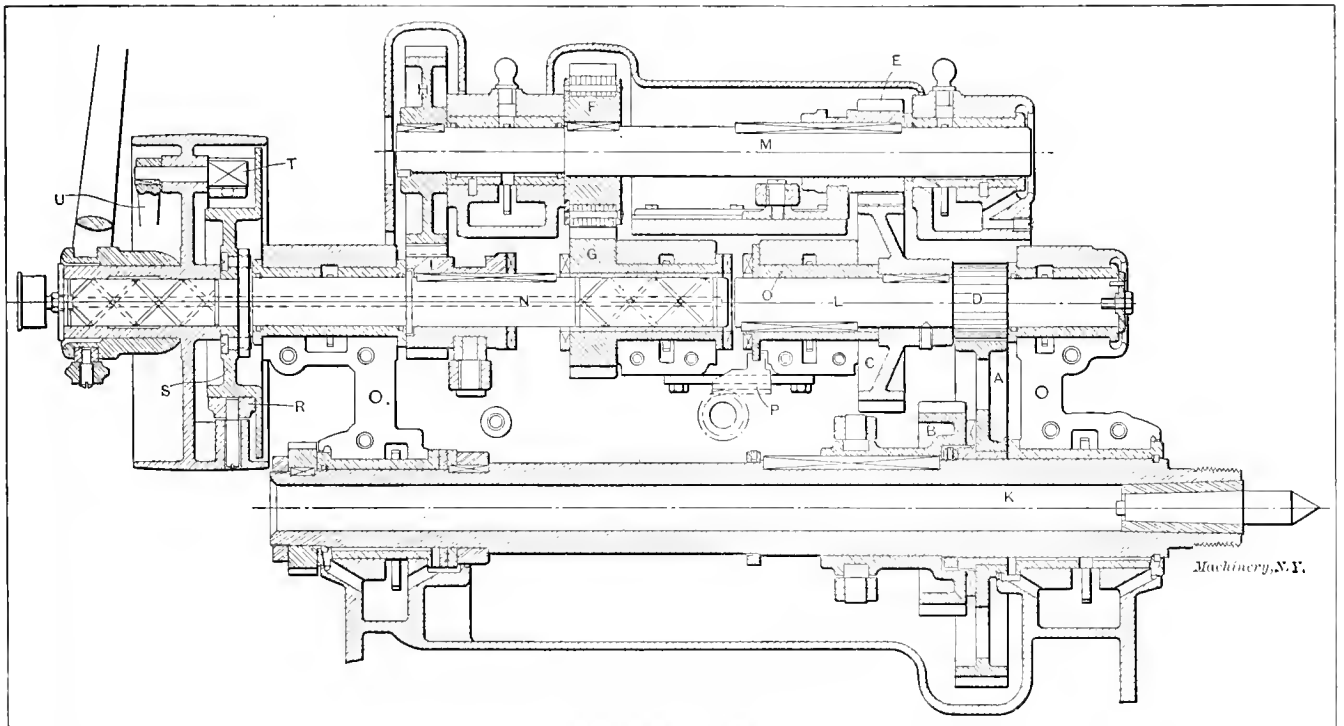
Section of Head-stock, showing Geared Drive of Norwegian Lathe
